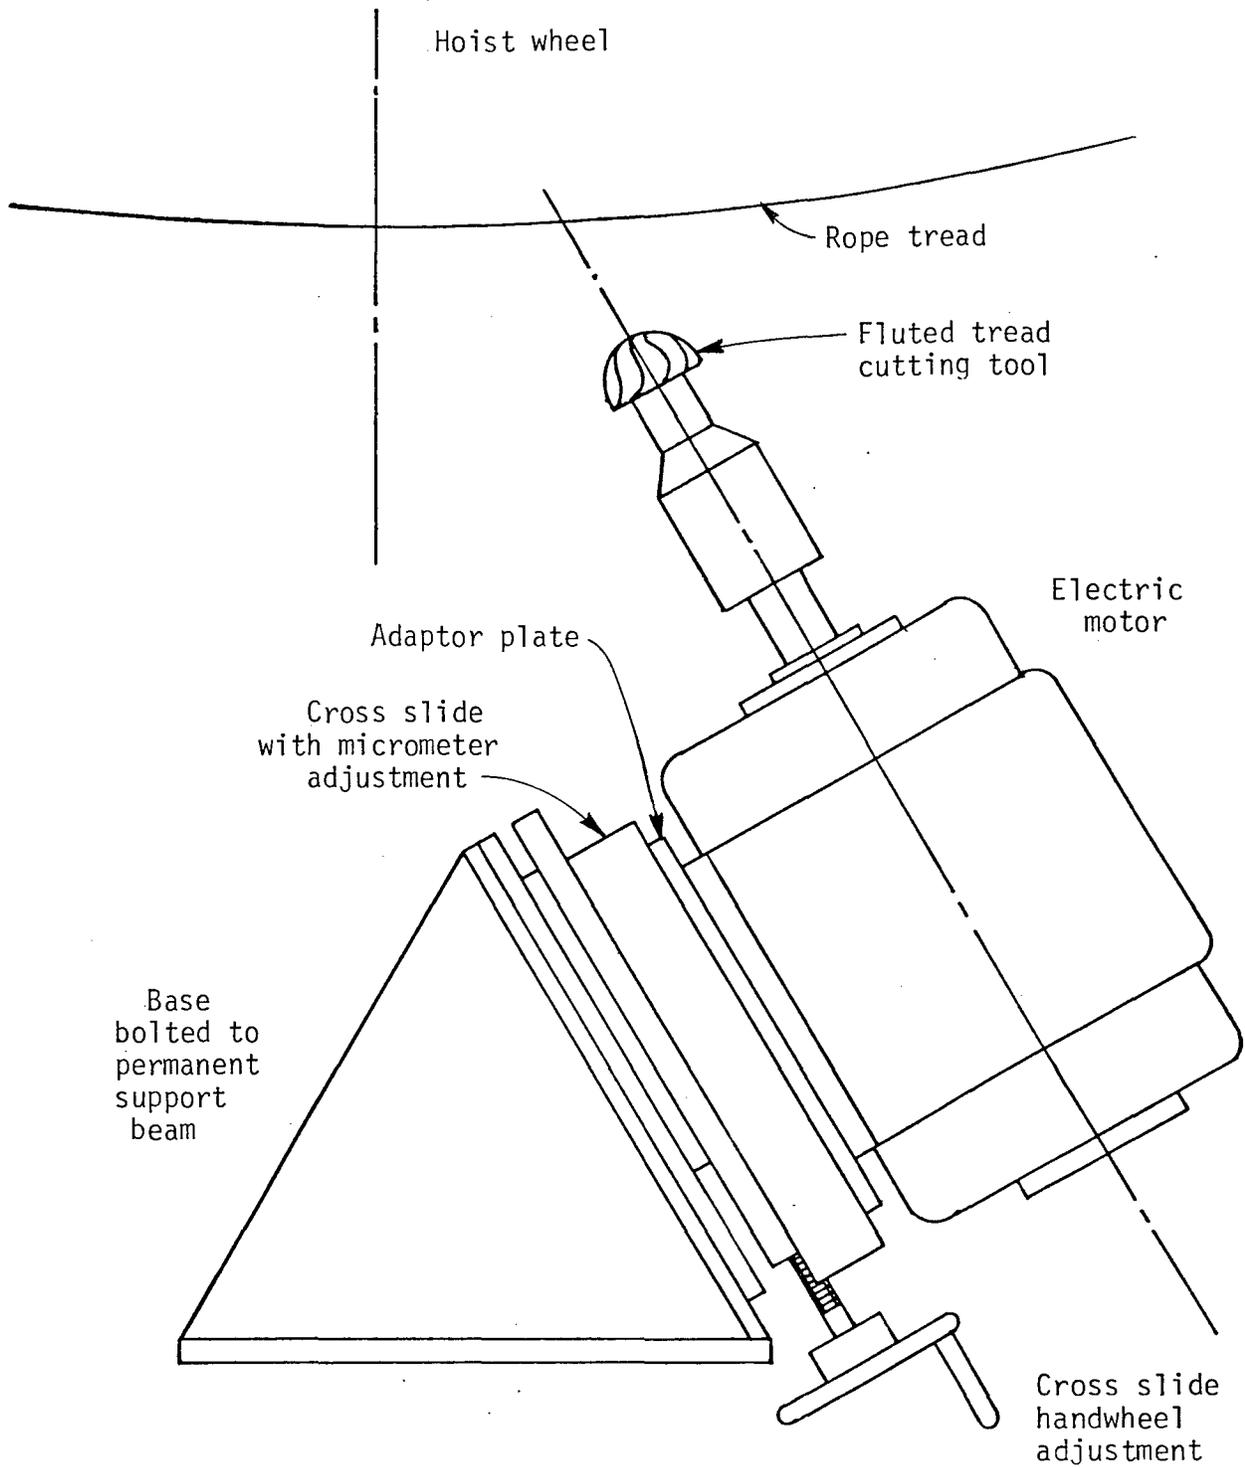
Typical Friction Tread Grooving Tool Arrangement
